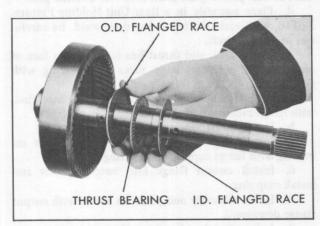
Installing Thrust Bearing on Inner of Rear Internal Gear
